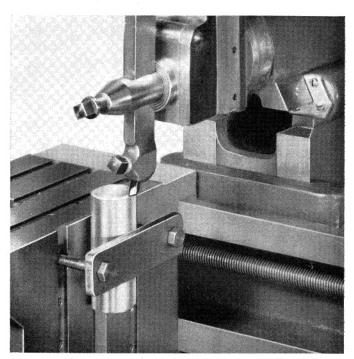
Machining End of Round Piece of Work, Held in "V" Groove on Side of Table.
